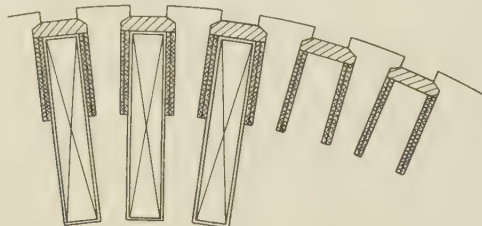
ARRANGEMENT OF POLAR WINDING, STARTING WINDING AND WEDGES IN ROTOR OF TWO-POLE SYNCHRONOUS MOTOR
